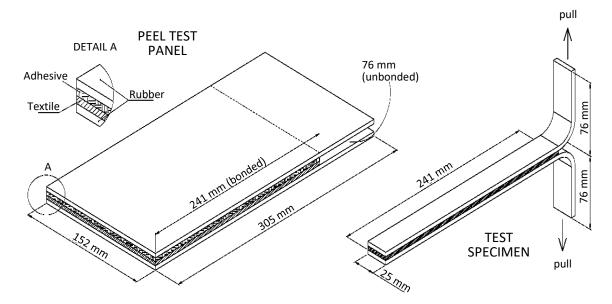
Configuration of peel test panel and peel test specimen (re-draw based on ASTM D 1876 with necessary adjustment)
